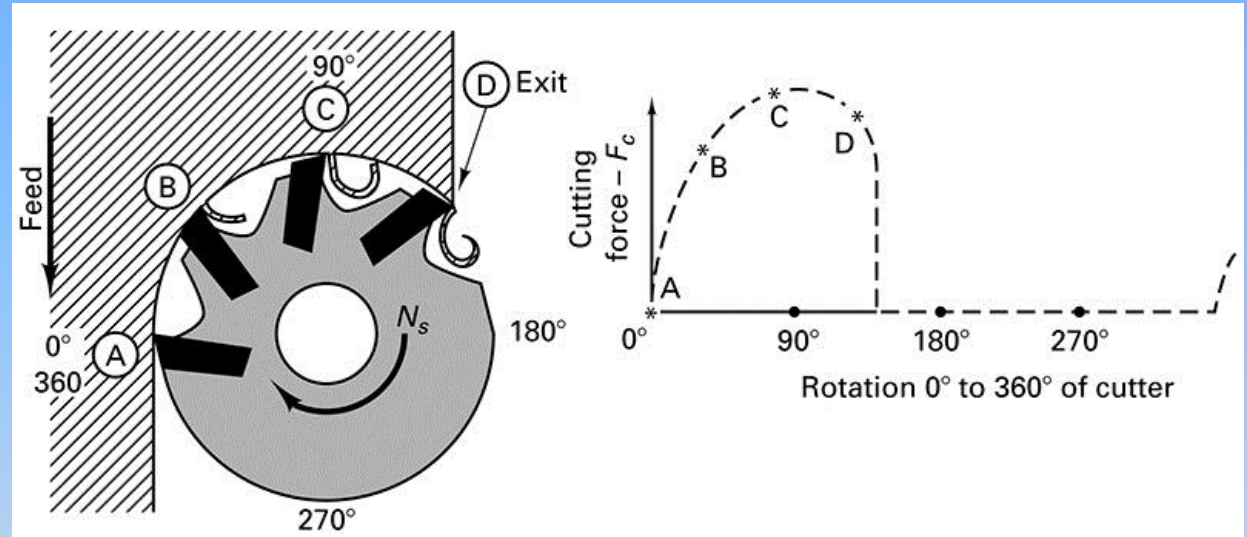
Conventional face milling (left) with cutting force diagram for F_c (right) showing the interrupted nature of the process. (From *Metal Cutting Principles, 2nd ed.*, Ingersoll Cutting Tool Company.)
